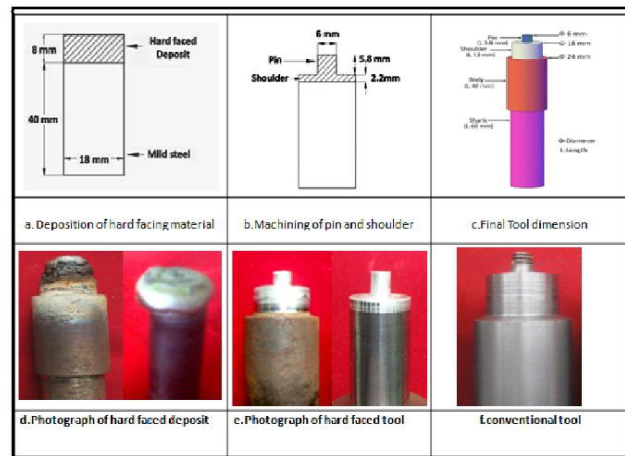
Schematic representation of hard faced tool fabrication ^[4]
